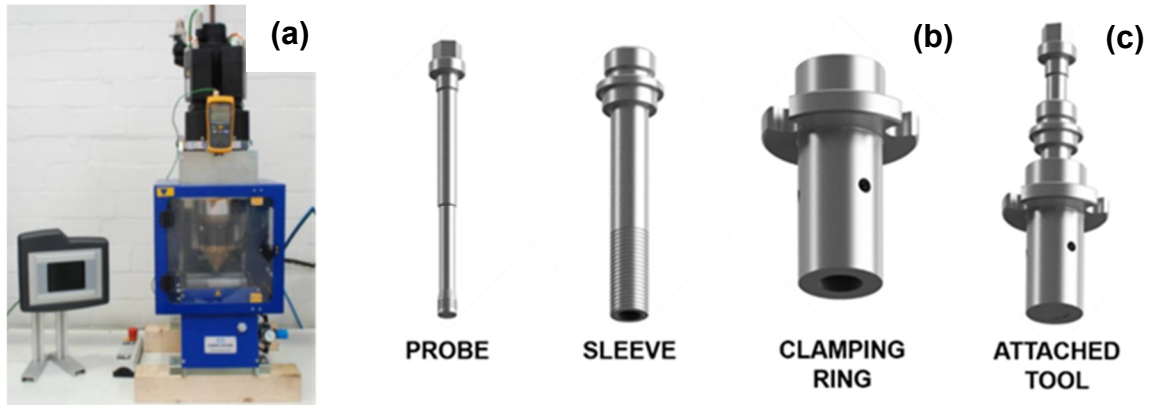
(a) Harms & Wende RPS 100 machine and (b) Tool components: probe, sleeve, and clamping ring. (c) The attached tool with all three concentric tools.
